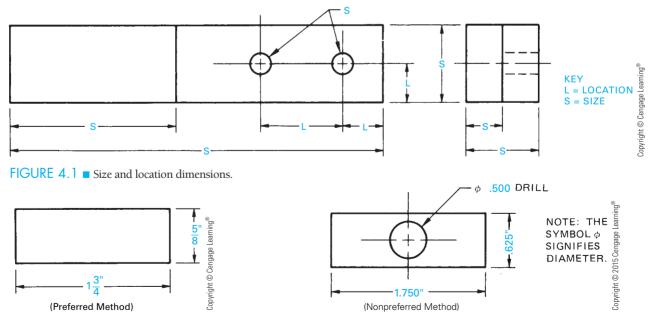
■ Fractional dimensions. Unidirectional dimensions are read from the bottom of the drawing.
